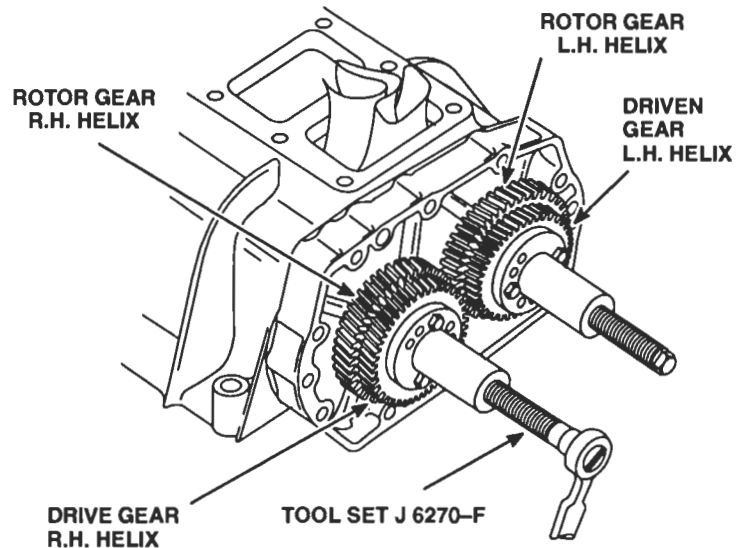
Removing Blower Rotor Gears from Blower Rotor Shafts
